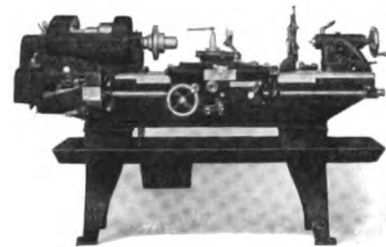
14 x 6 Medium Pattern Equipped with Oil Pan Pump, Piping, Taper Attachment and Draw-in Collet
